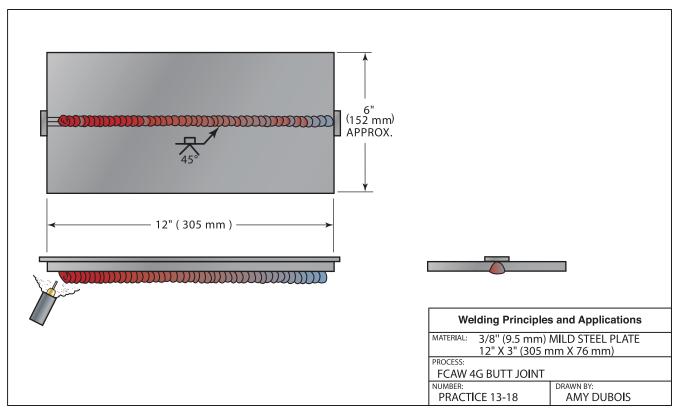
FCAW 4G butt joint, 3/8-in. (9.5-mm) mild steel.
